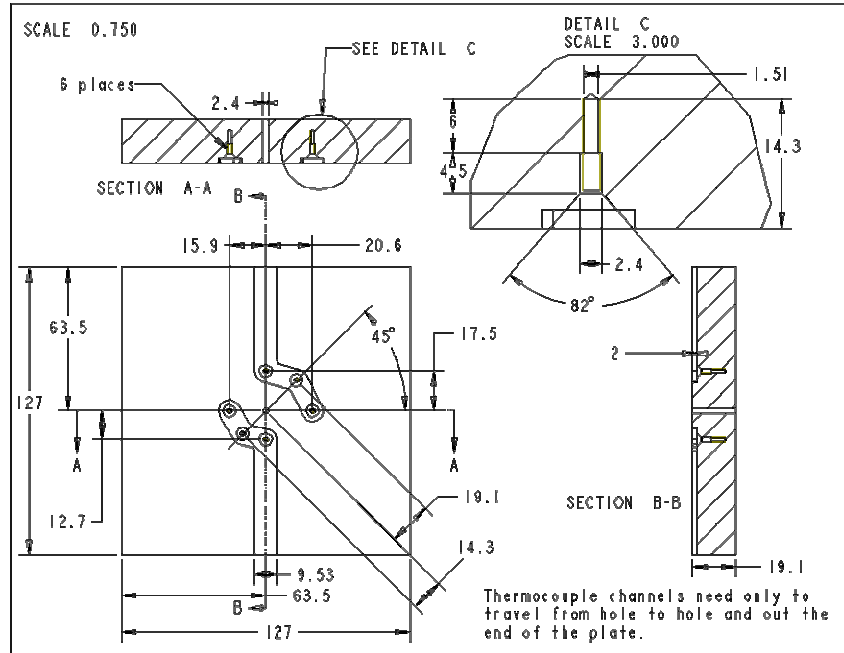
Drawing showing the billet dimensions and thermocouple channels.
